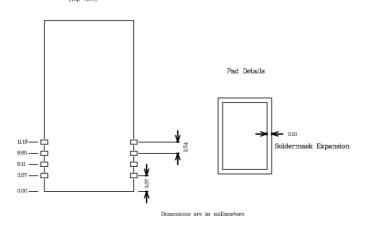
RECOMMENDED PCB FOOTPRINT
